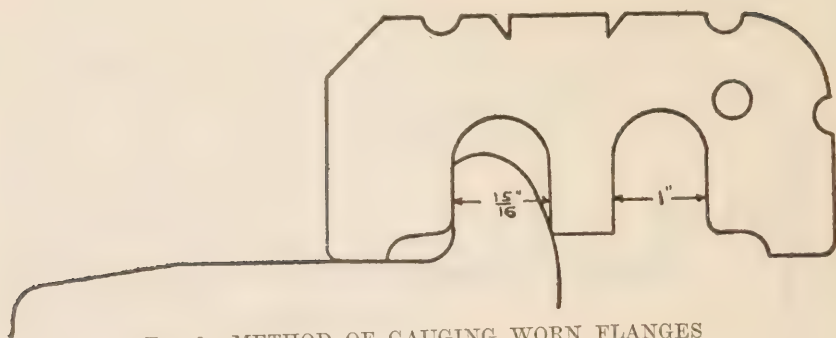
METHOD OF GAUGING WORN FLANGES
